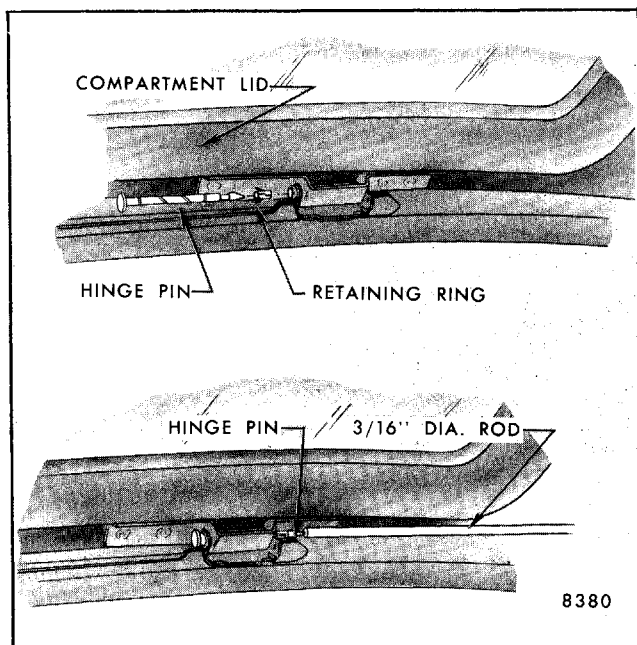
Hatchback Lid Hinge - "H-07, 77" Style - Right Side Shown
